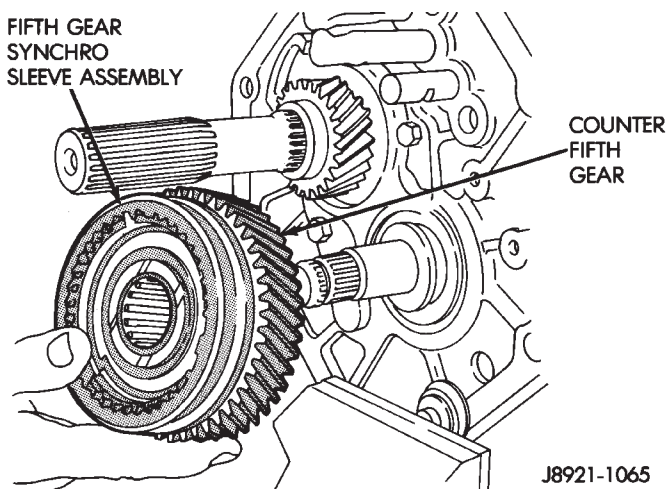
Counter Fifth Gear And Synchro Assembly Removal
